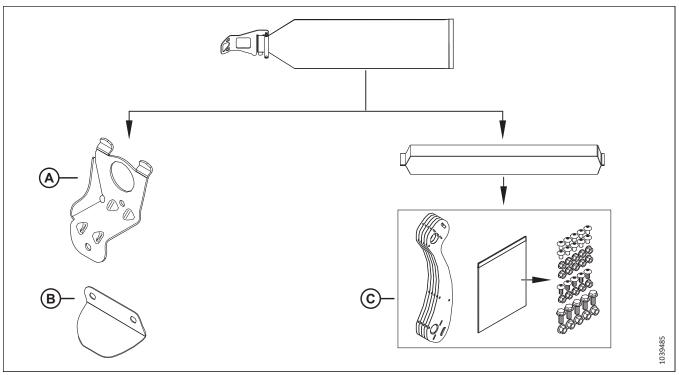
Reel Endshield Parts Bag MD #340985 - MD #340986 is Similar
